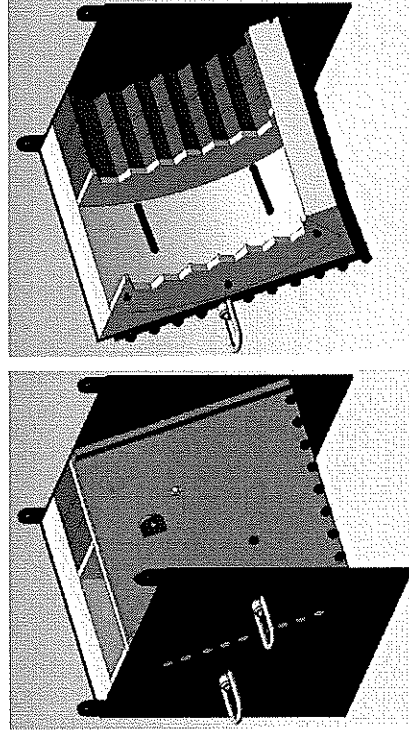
RENDER OF THE PSR MOLD IN THE "CENTER CORE OUTER REFLECTOR" CONFIGURATION: FULL ASSEMBLY (LEFT) AND FRAME WALL, MOLD CAP, AND INSIDE PLATE REMOVED FOR CLARITY (RIGHT).
